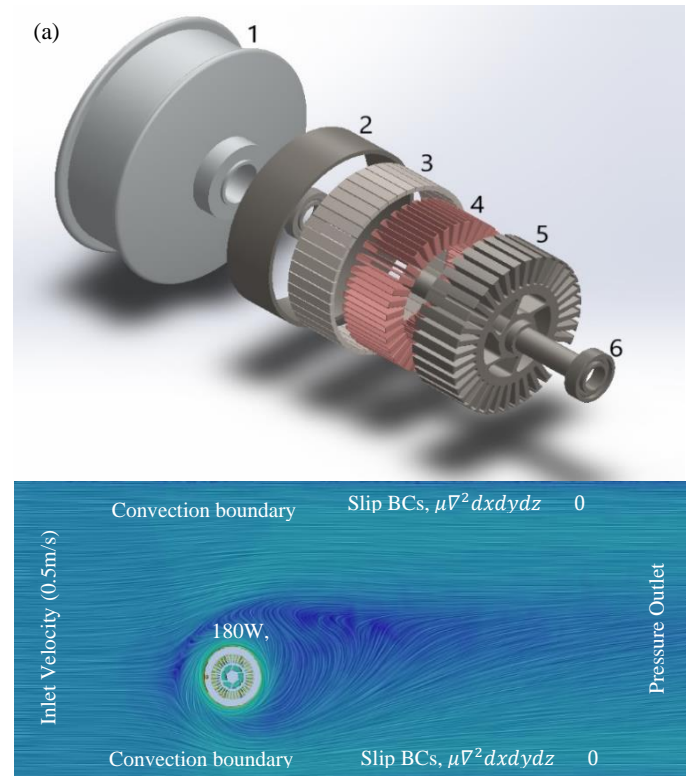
(a) Shows the exploded view of the 3D CAD design of wheel-hub-motor. 1-Rotor, 2-Sleeve, 3-Permanent Magnet, 4-Copper windings, 5-Stator and shaft, 6- Bearings. (b) Shows the simulation domain and boundary conditions applied in conjugate heat transfer analysis of the motor.
